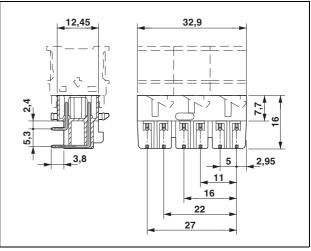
Dimensions of header HSCH 2,5-3U/12 9005
